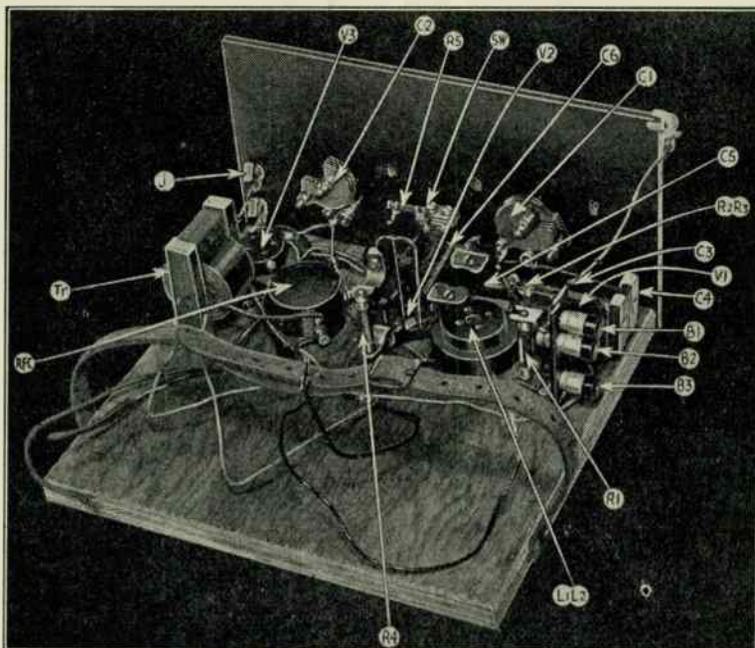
Fig. B. Rear view of the "Craft Box." All the parts, few in number, are easily seen. What parts would YOU use?
